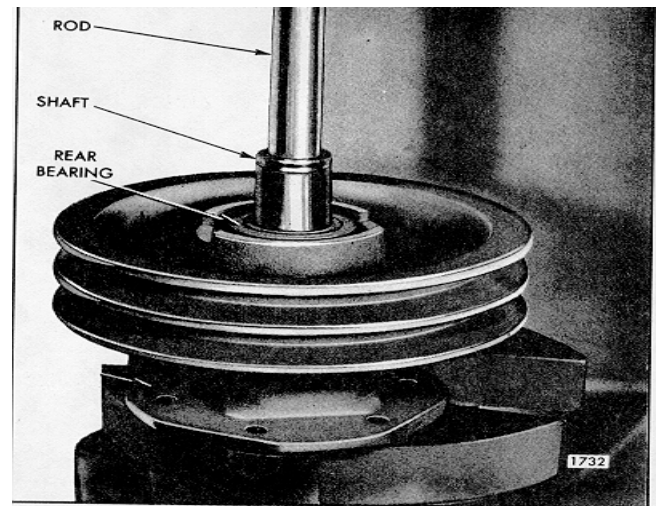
Removing Fan Shaft and Front Roller Bearing from Hub
